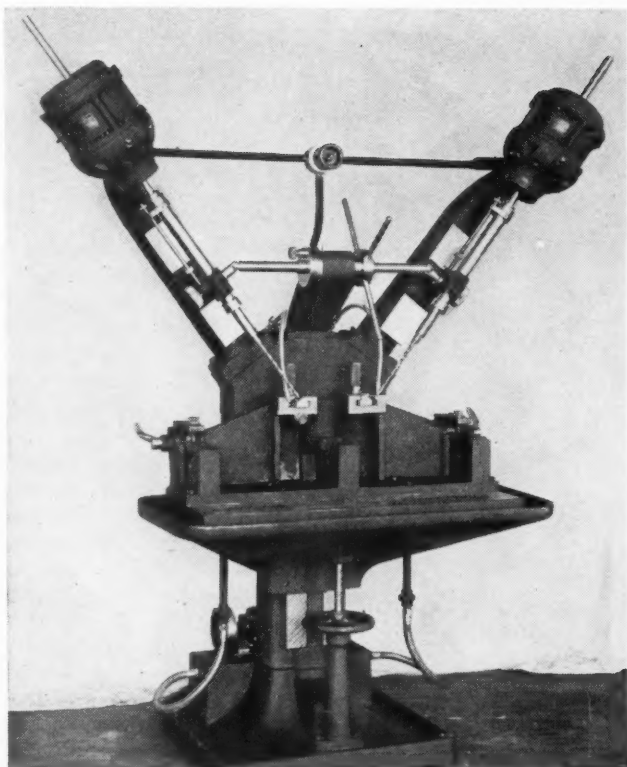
MANUALLY OPERATED MACHINE FOR STEP DRILLING OIL HOLES IN AN AUTOMOBILE CRANKSHAFT
